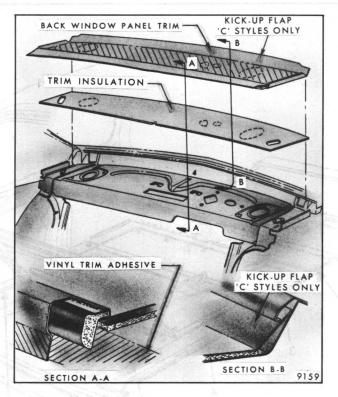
Back Window Trim Panel and Insulator Attachment - Typical "A-B-C-E and F" Styles
